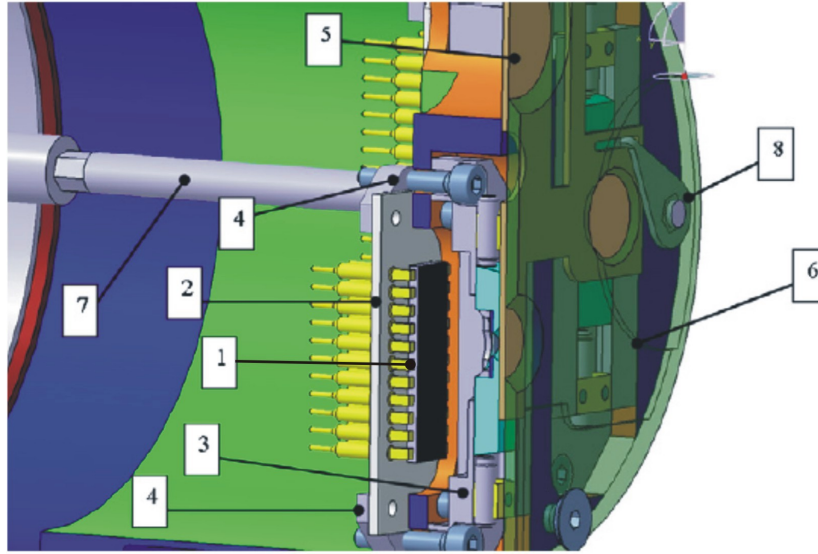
Port cut through (1-detector, 2-detector socket, 3-air slit holder, 4-nut, 5-shutter, 6-hood (holds the shutter), 7-connection shaft (link shutter jack and rotary feedthrough), 8-shutter jack)
